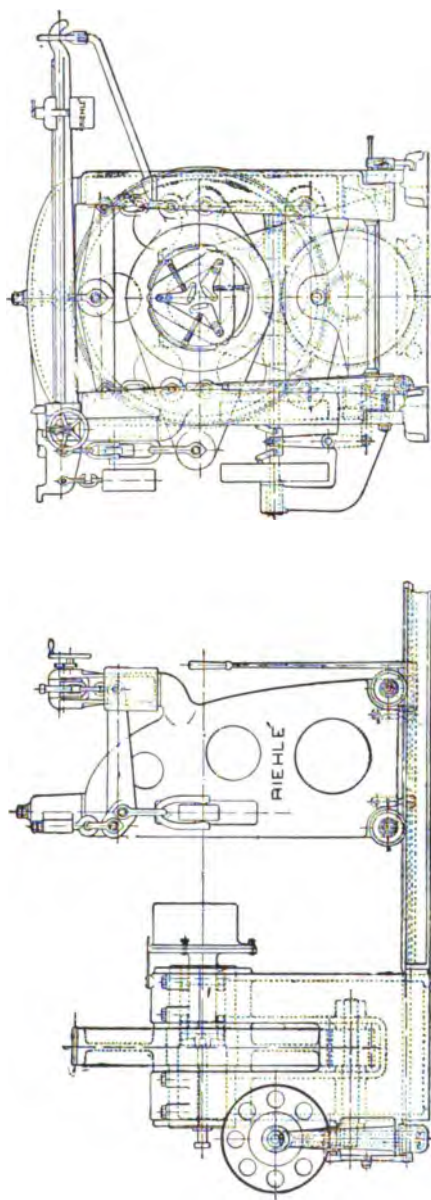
MESSRS. RIEHLE'S IMPROVED FORM OF TORSIONAL TESTING MACHINE.
